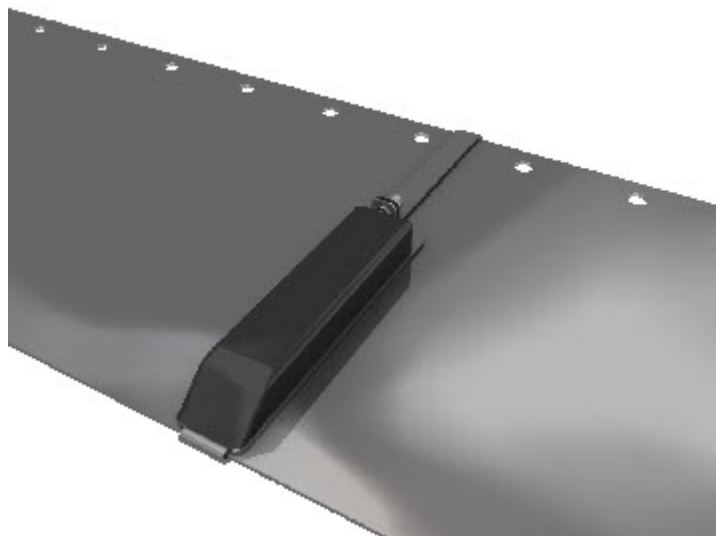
Continue attaching sensor and carrier plate to mounting ring
